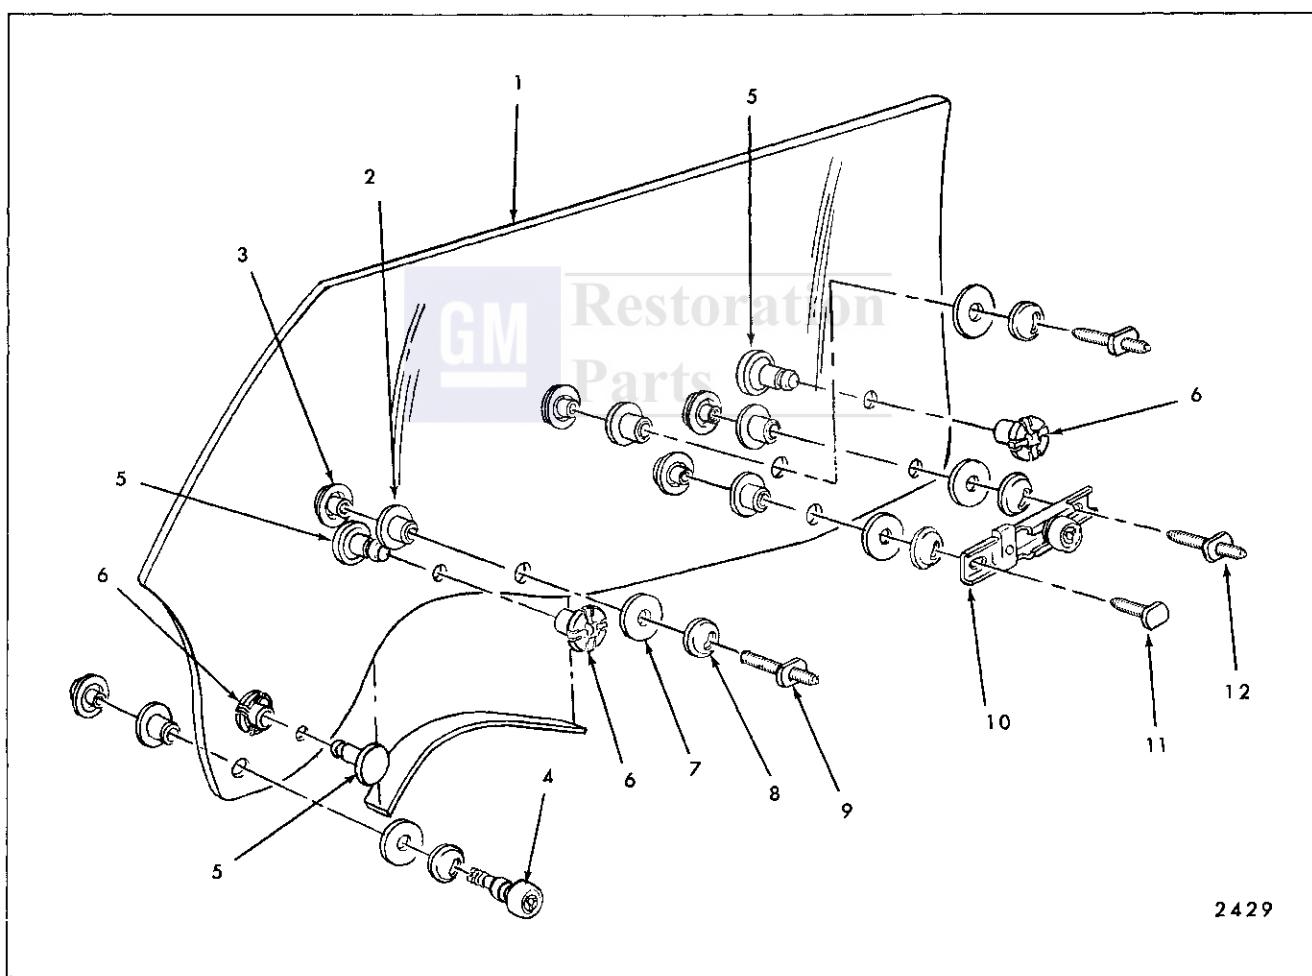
Front Door Window Assembly - 16647 and 26657 Styles
